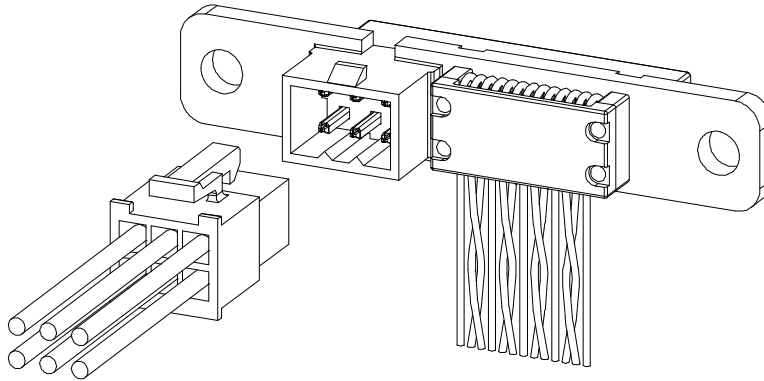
A 6-pin power receptacle mating to a Bulkhead DA power header.
